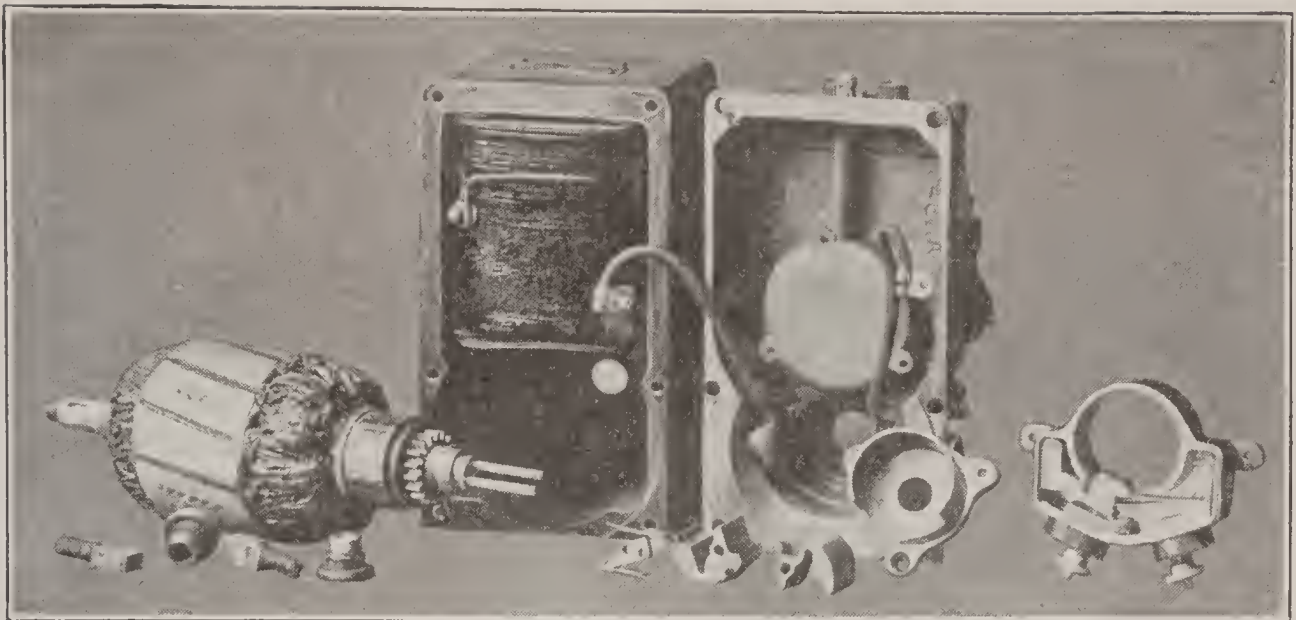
Details Westinghouse Lighting and Ignition Generator
